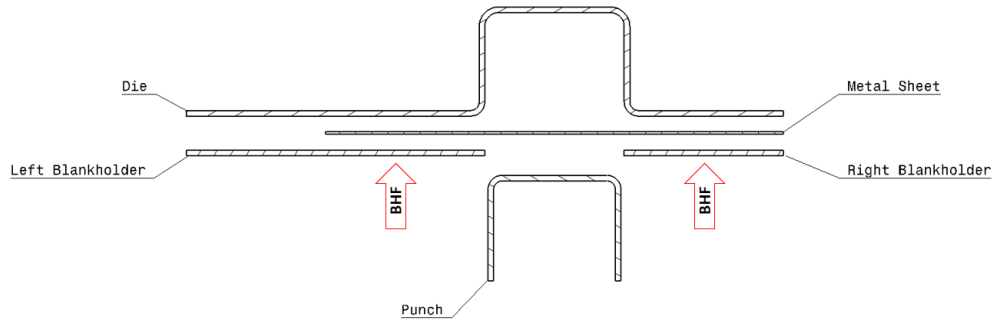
Blankholder forces applied to the specimen (S-Rail assembly cut section)
